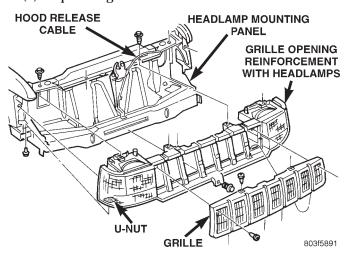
Grille and Grille Opening Reinforcement(GOR)
